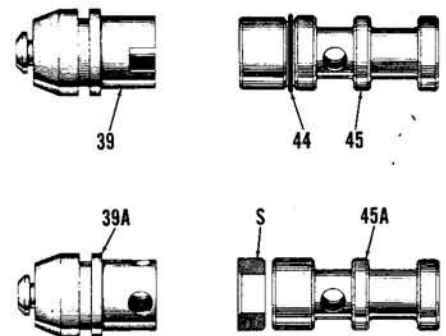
View showing early type (top) and late type (bottom) check valve seat and pilot. Refer to text for interchangeability.
